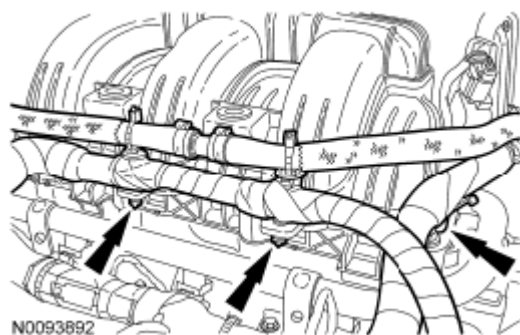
Locating Wiring Harness Retainers To Upper Intake Manifold
